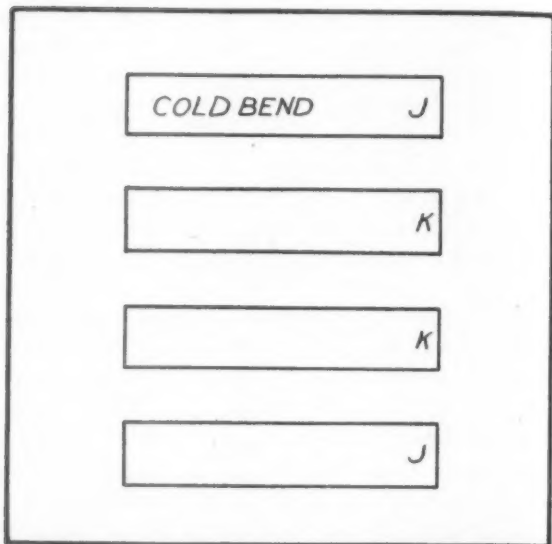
POSITION OF COLD BEND SAMPLES REMOVED FROM  $\frac{3}{4}$ -IN. SECTION A SHOWN IN FIG. 4.
